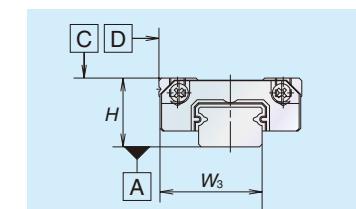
Drawing for accuracy standard (Mounting width W_3)
